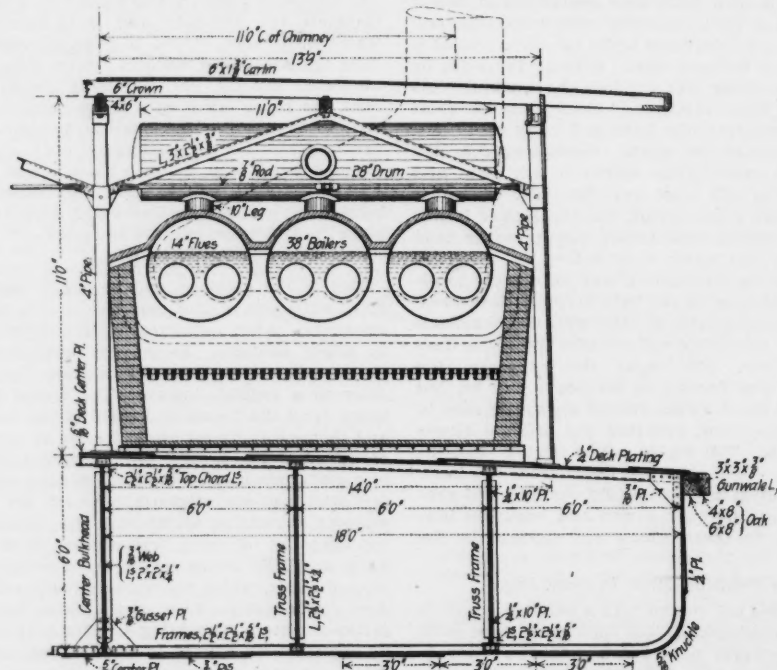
HALF CROSS-SECTION AT BOILERS. STEAM TENDER FOR HANDLING DREDGES ON THE MISSISSIPPI RIVER.
